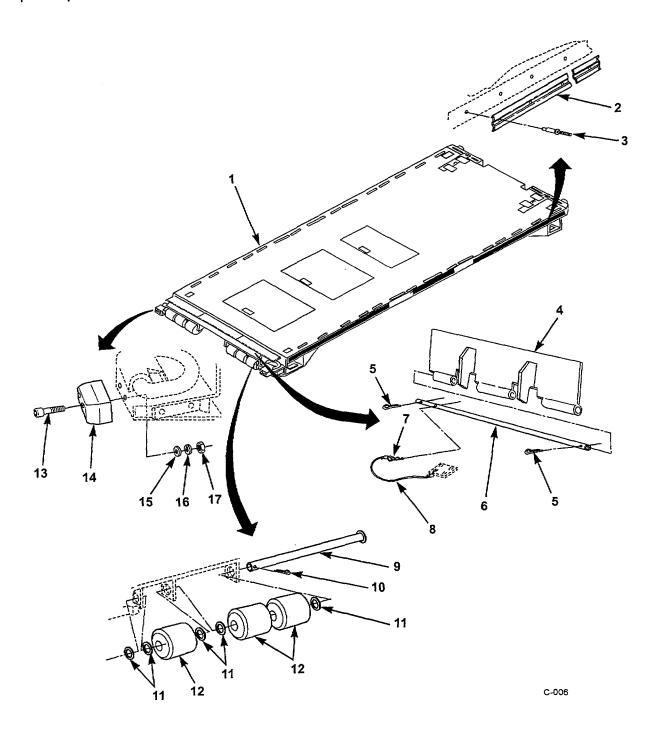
BASE ASSEMBLY AND REAR FRAME COMPONENTS, M3A1
